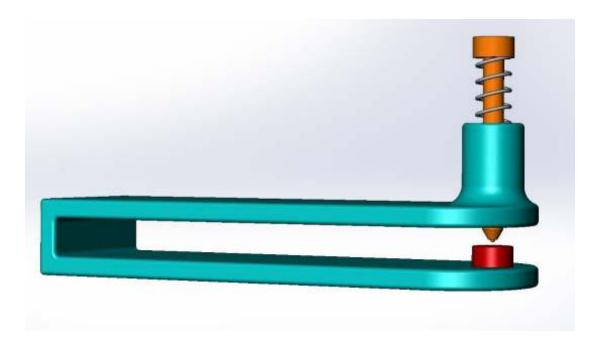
Template Embossing Tool – for making dots in sheet metal templates
